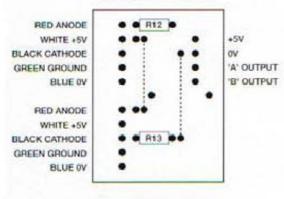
B DIRECTION AND COUNT BOARD -TRACK LAYOUT
